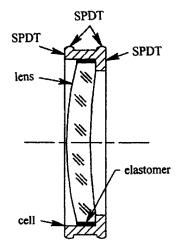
The poker chip module described in the text. Surfaces to be machined by SPDT techniques are indicated.
